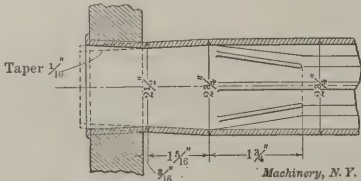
Boiler Tube Setting, Northern Railway of France.
